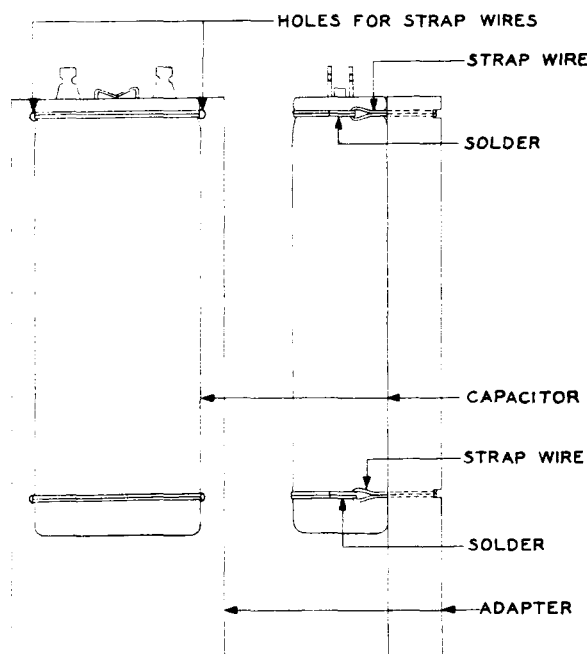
447A Capacitor Mounted on P-431343 Adapter
